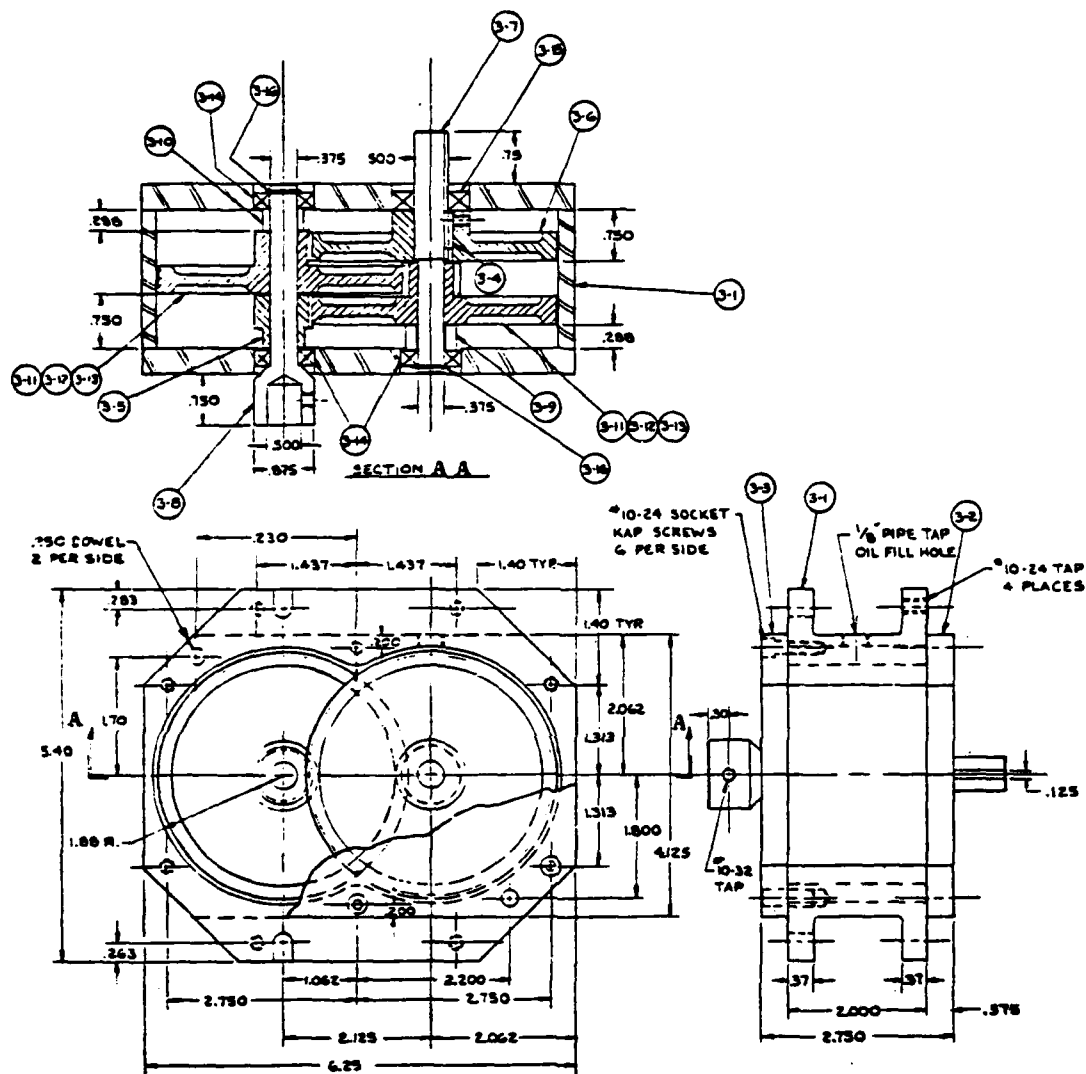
GENERAL ASSEMBLY OF ROTARY ACTUATOR SPEED REDUCER
